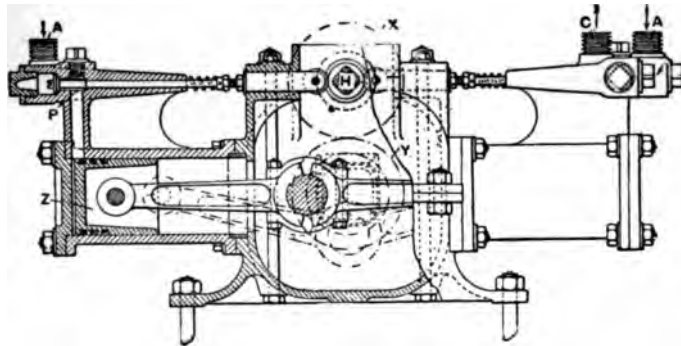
SIDE ELEVATION OF SERPOLLET MOTOR.
